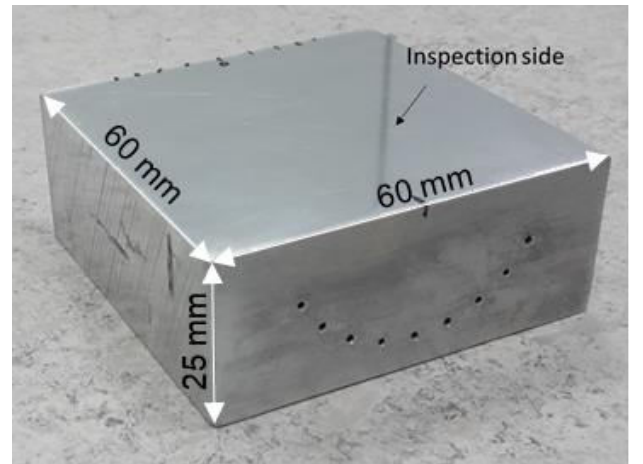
Experimental test sample, showing the inspection side and the 9 cylindrical side-drilled holes.
